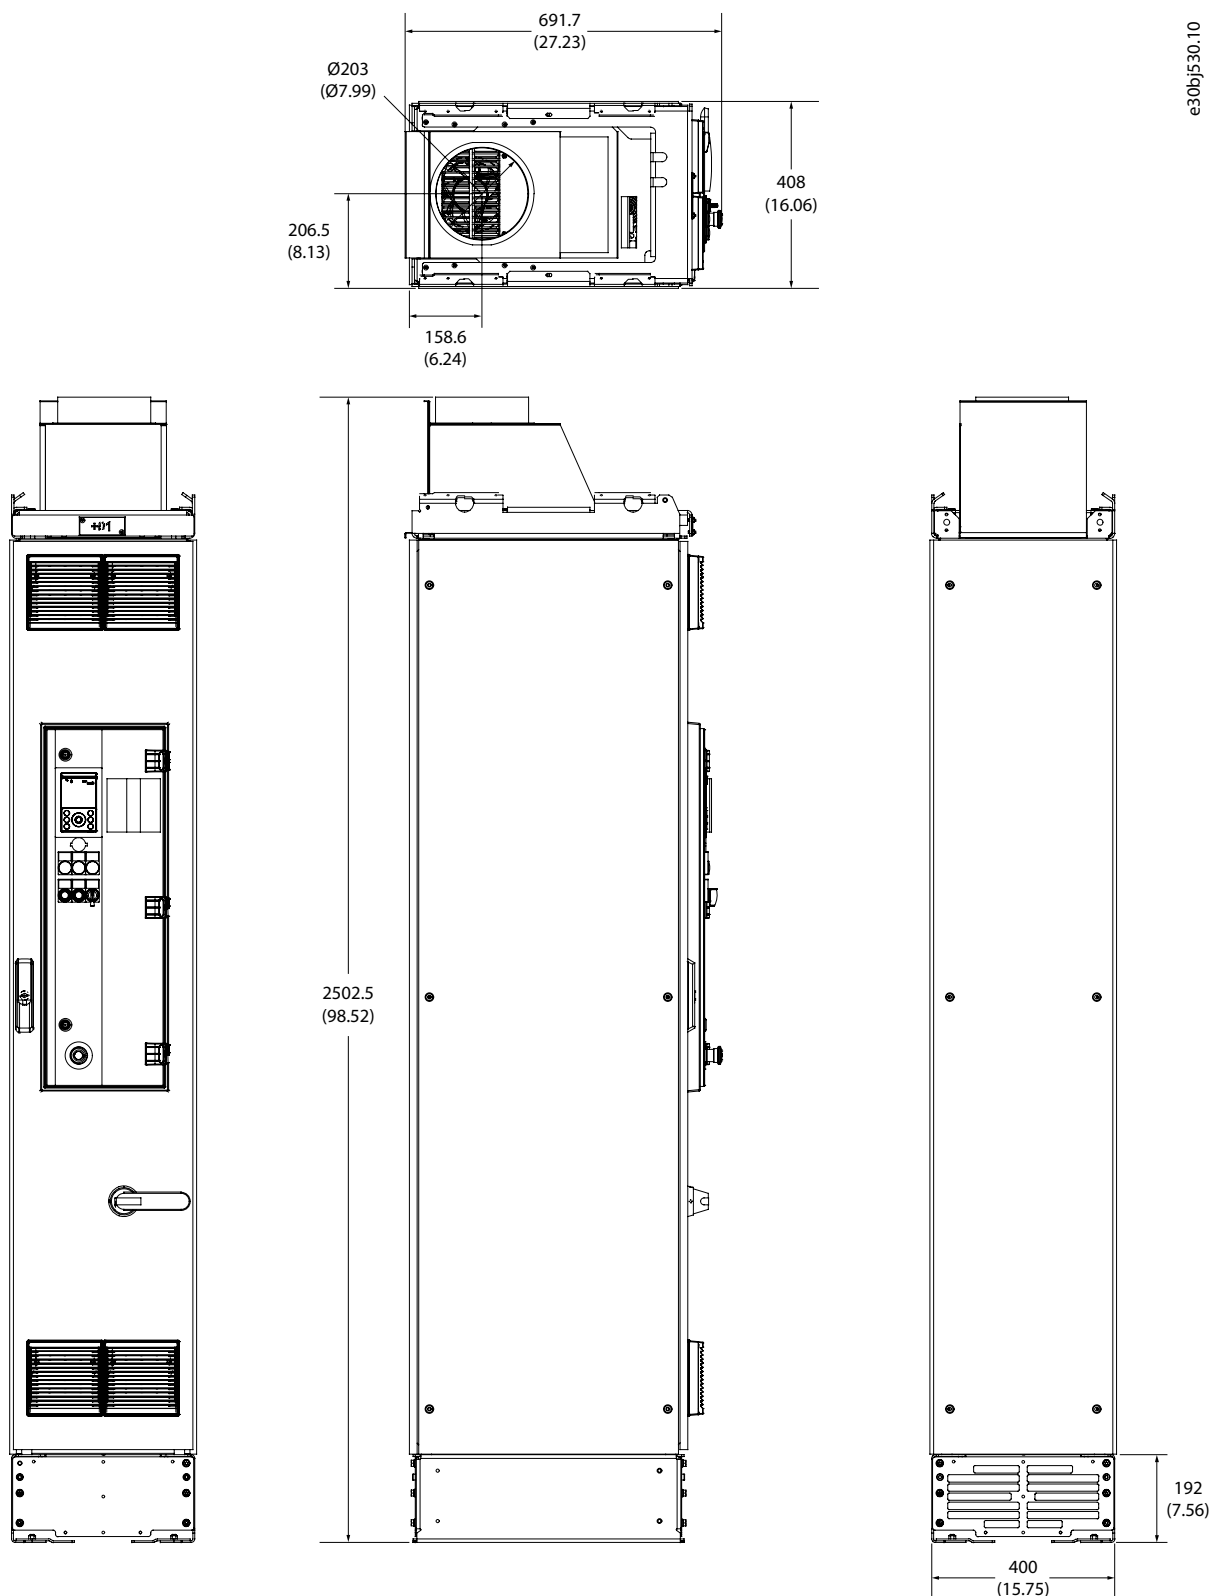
Dimensions for the Cooling Air Output Flange (+OAF), FE9, in mm (in)
